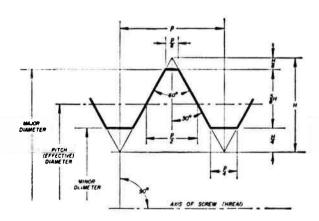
ISO basic profile for inch and metric screw threads.
